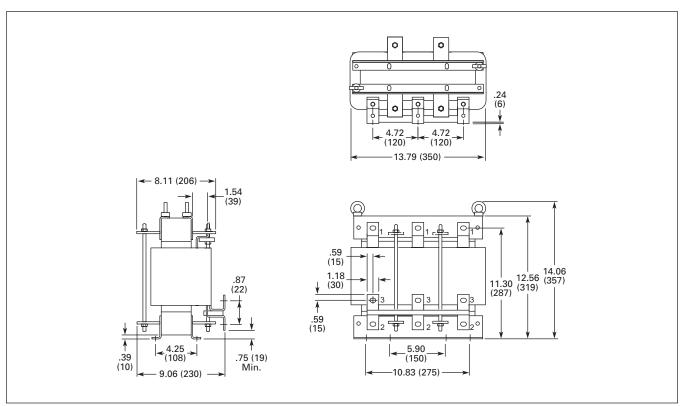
Dimensions of AC Choke CHK0261 in Inches (mm)
